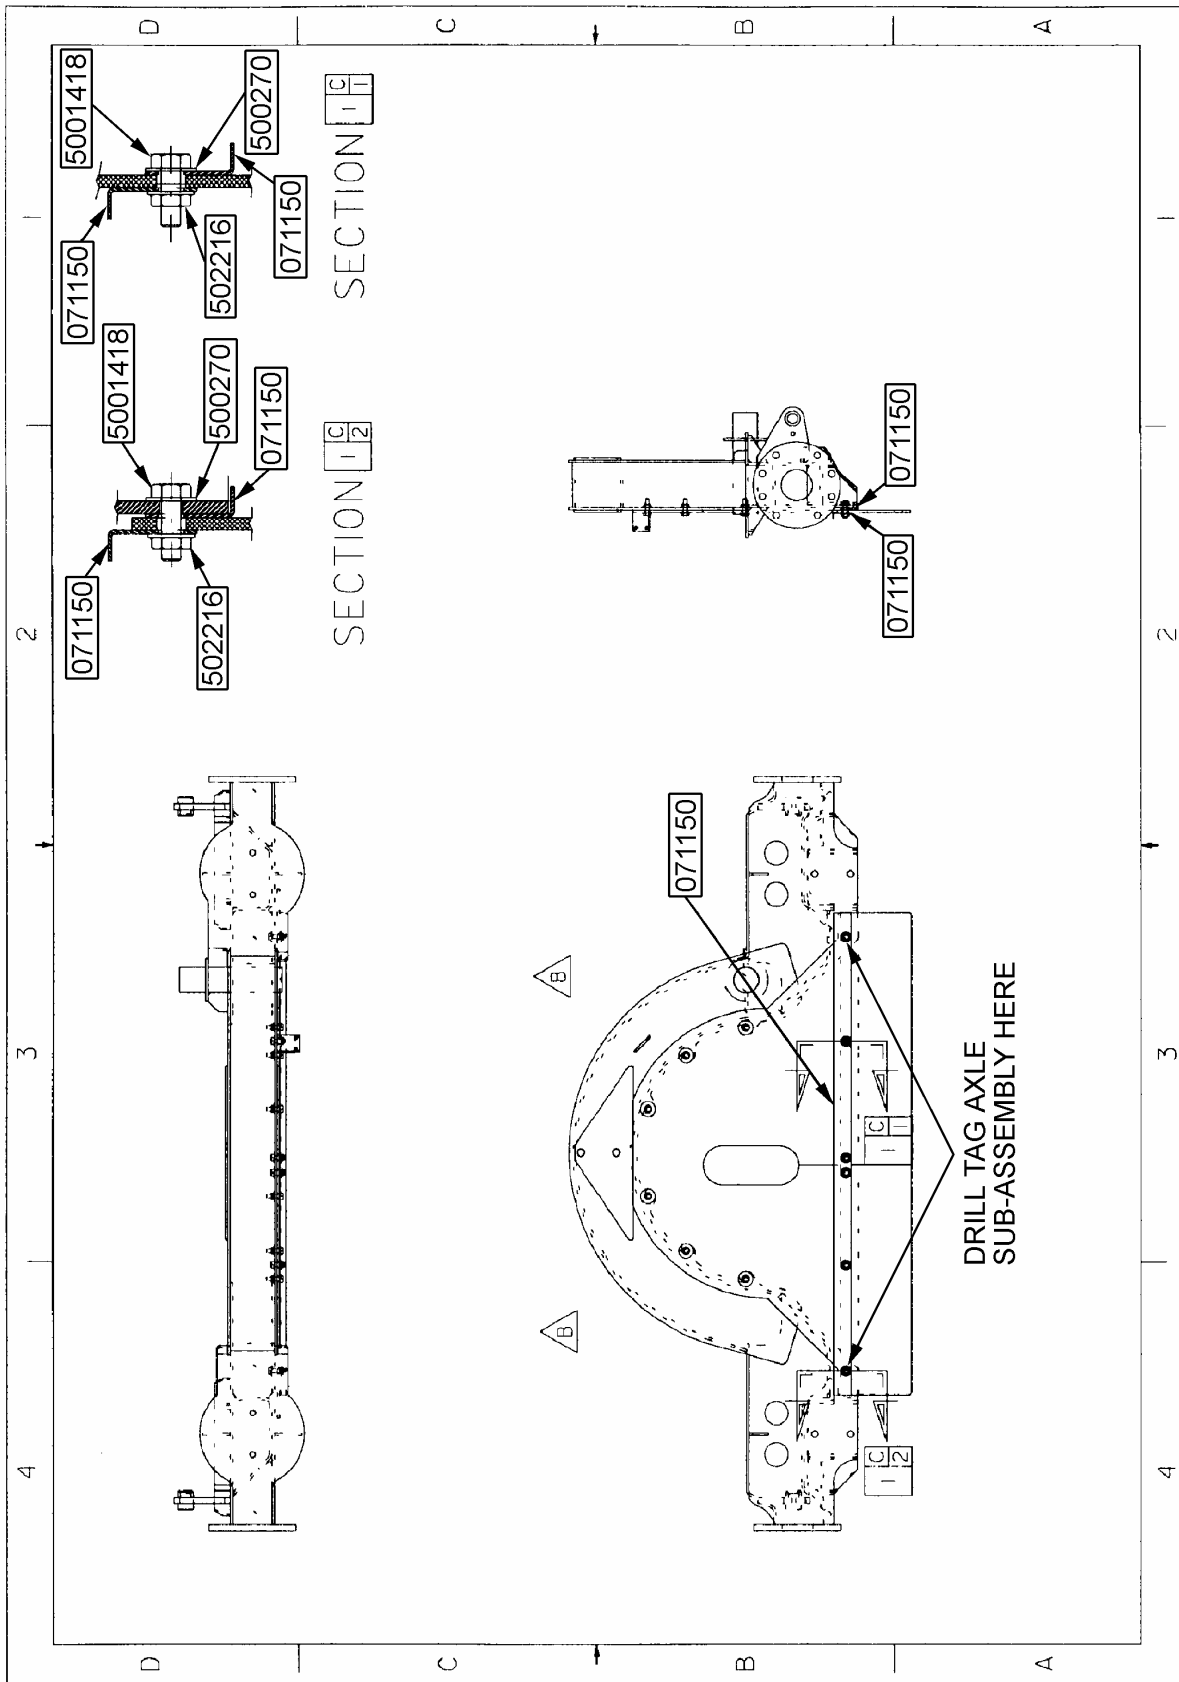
FRONT PROTECTIVE PANEL (PRÉVOST #071072) INSTALLATION
